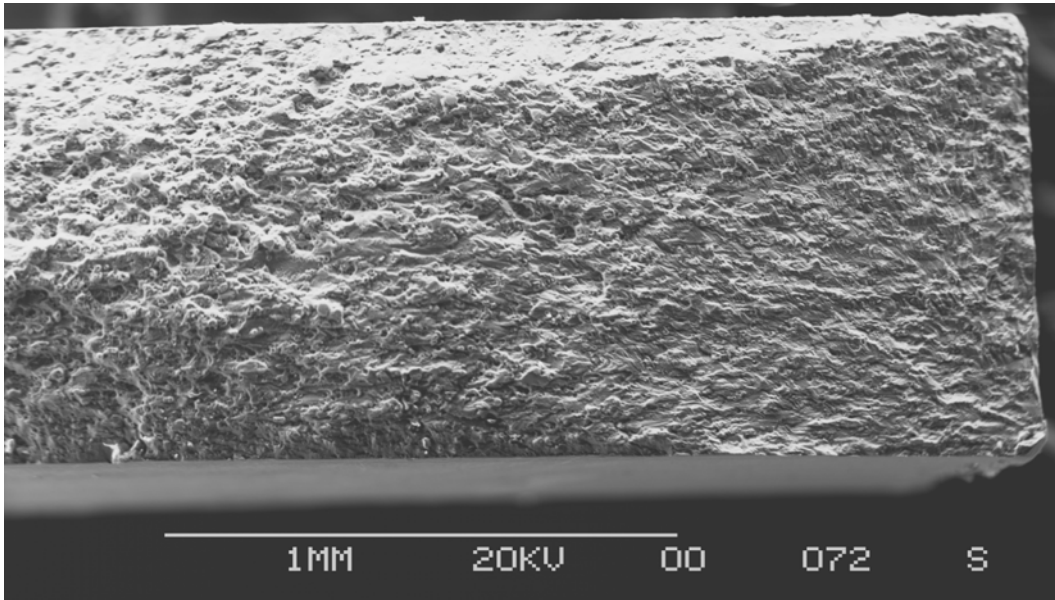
Fatigue Crack on Fracture Surface of Specimen 5776.
